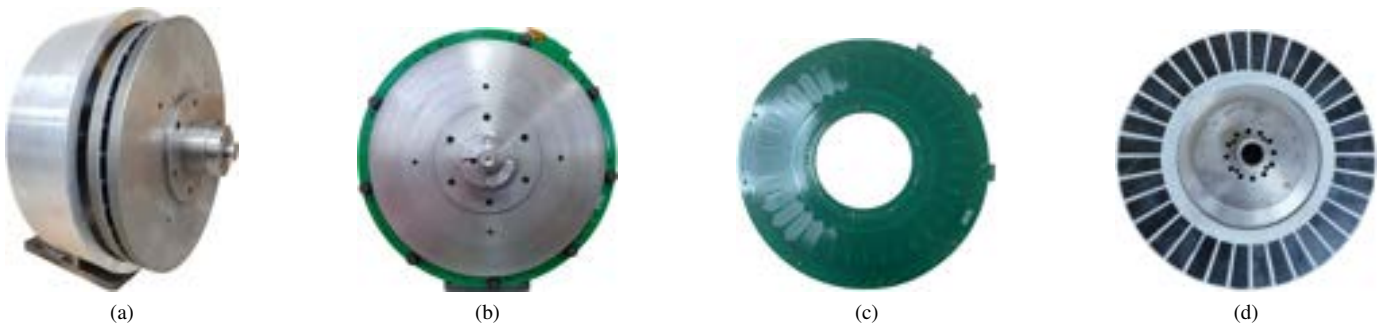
The prototype three-phase double-rotor single-stator coreless axial flux PM machine with a rated torque of 19Nm at 2,100rpm (a). The assembled machine where the PCB stators are mounted on the machine hub (b). Three 36-pole PCB stators stacked together that are mechanically shifted by 6.66 degrees to form a 3-phase back-EMF (c). The 36-pole permanent magnet rotor with NdFeB PMs (d).
